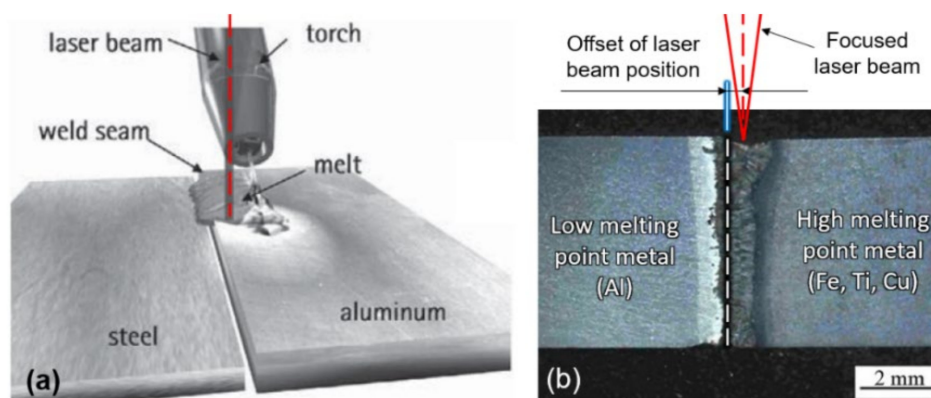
(a) Laser-assisted arc welding or laser welding–brazing for thin components [72] and (b) keyhole laser beam welding for thicker components [80].
